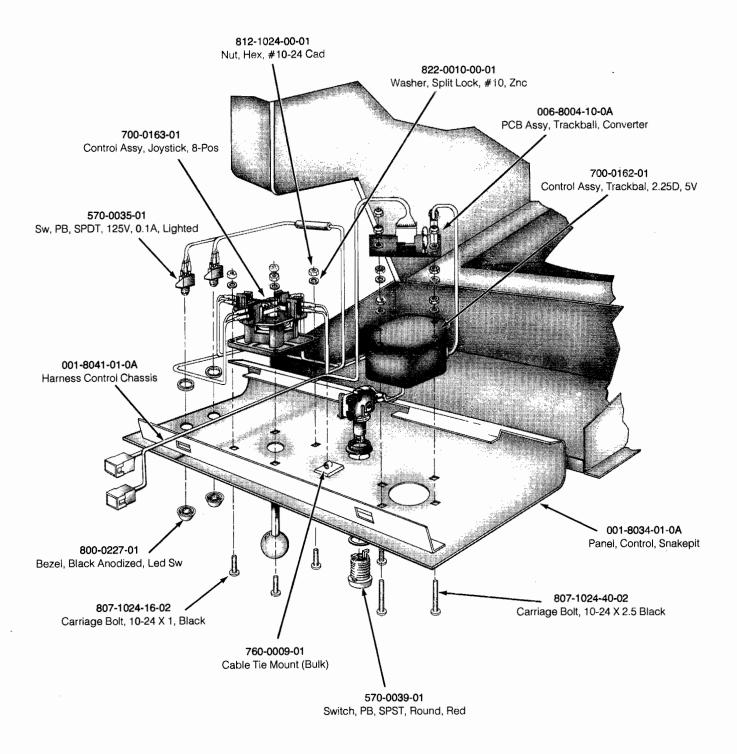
Control Panel Assembly, Snakepit (000-8002-10-0A)
